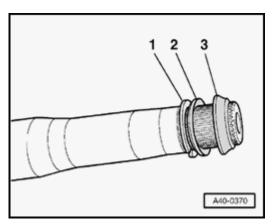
Location Of Spacer And Spring Washer (Wheel Side) Courtesy of VOLKSWAGEN UNITED STATES, INC.
